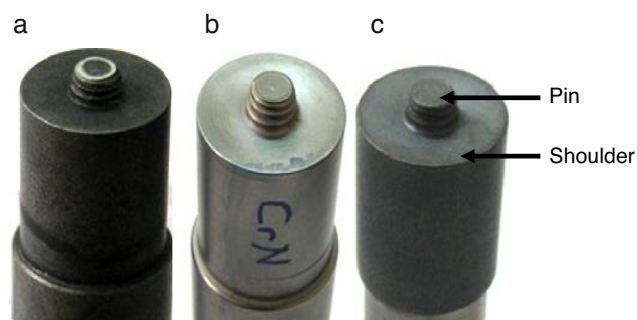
Tools of FSWed of MMC plates: (a) Uncoated tool, (b) CrN coated tool, (c) AlTiN coated tool.
